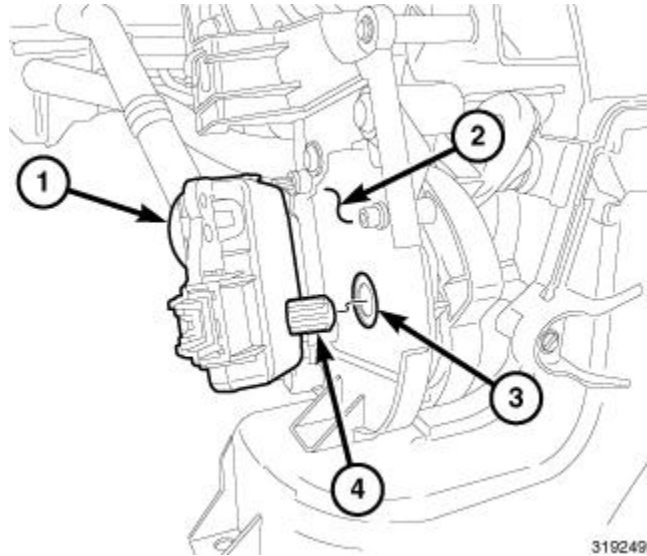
Mode Door Actuator, Bracket, Actuator Output Shaft & Mode Door Cam
